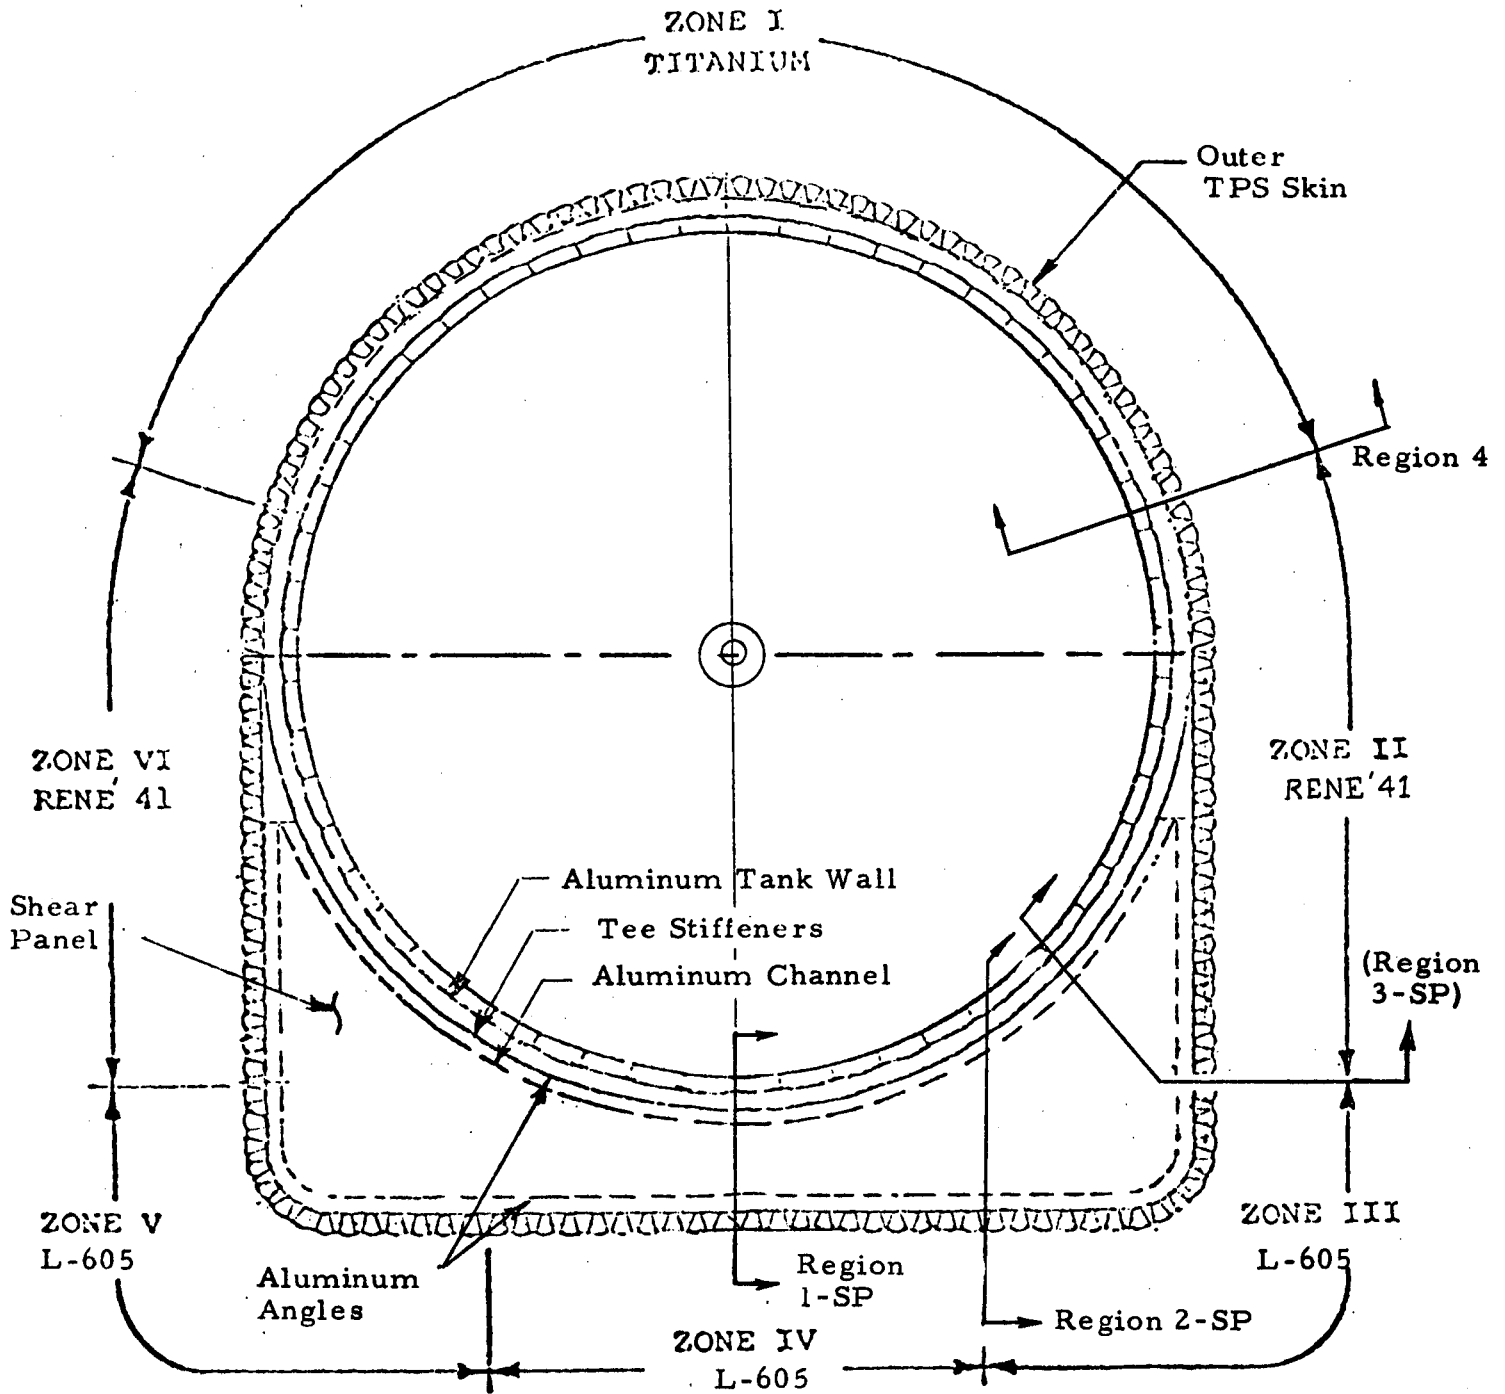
Cross-Sectional View of Prototype I - Test Article 1 Showing Location of Two-Dimensional Models at Ring 6
